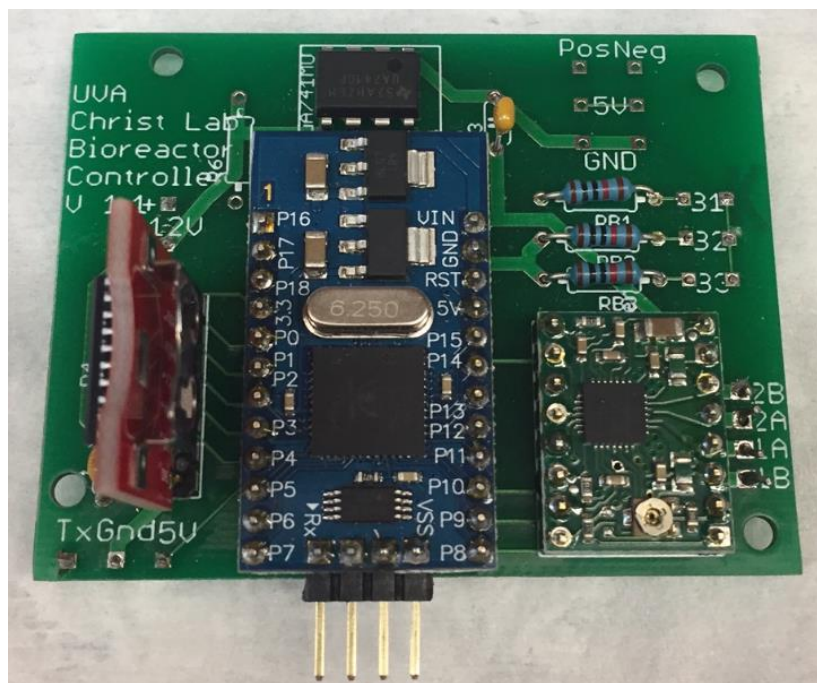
, 2nd Generation Assembled BrC PCB
